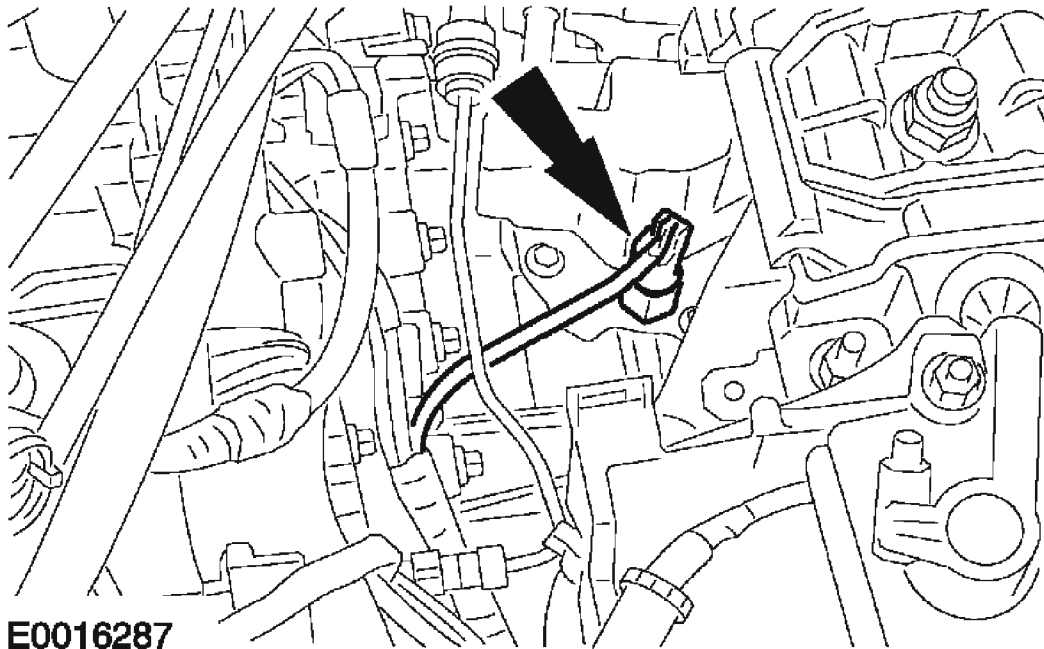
Connecting Reversing Lamp Switch Electrical Connector
